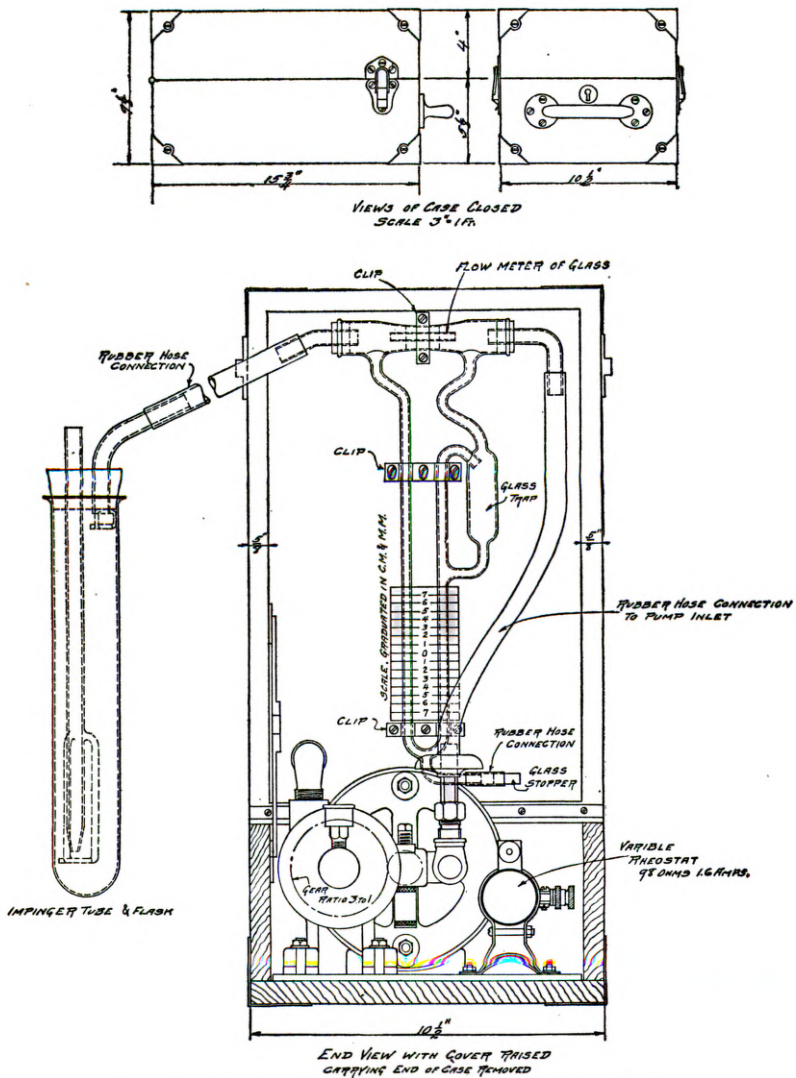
Drawing of electrically driven suction apparatus, end view.
